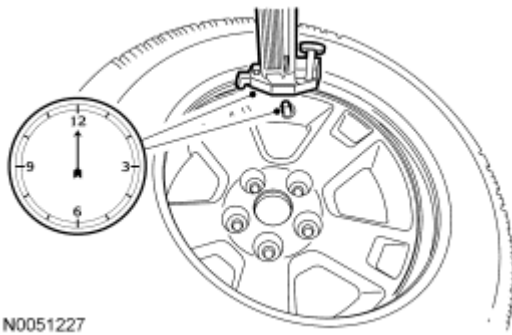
Identifying Alignment Position Of Valve Stem With Machine Arm (Top Bead)
